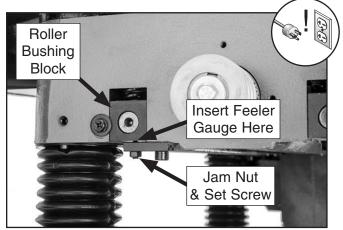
Feeler gauge location for adjusting infeed roller height when using wood blocks.
